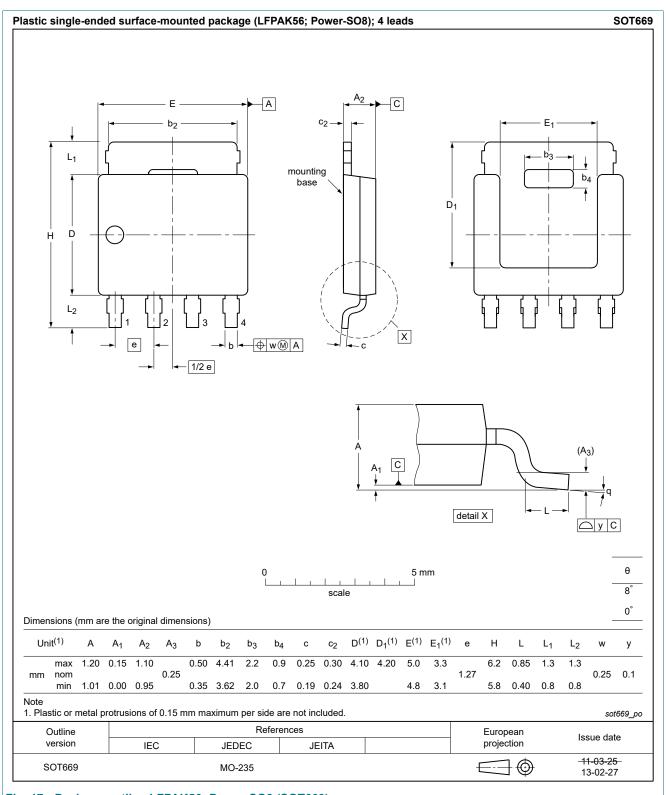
Package outline LFPAK56; Power-SO8 (SOT669)
